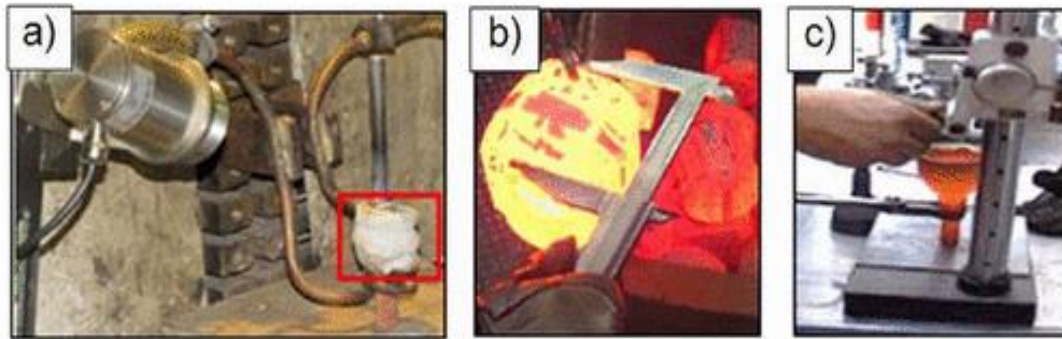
(a) hook perform, (b) flange forging and (c) height measurement
